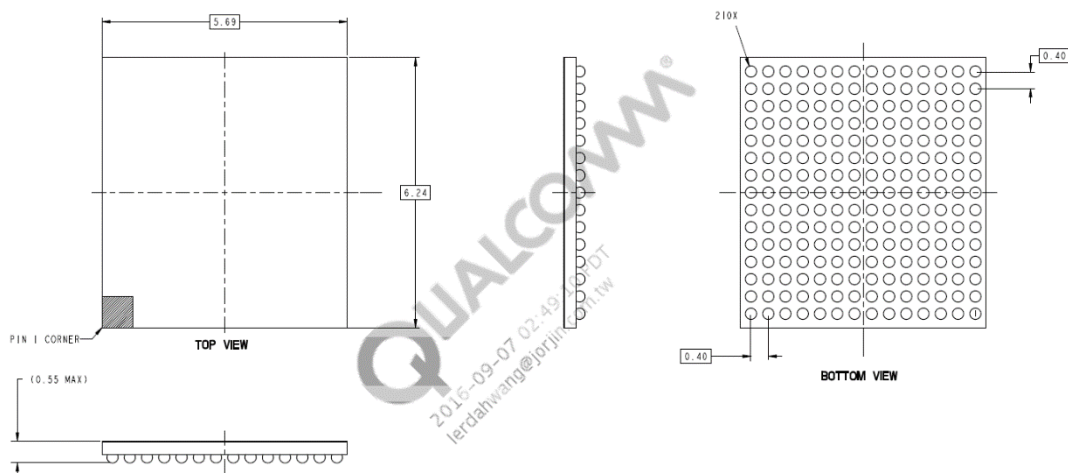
210WLN5P 5.69x6.24x0.55 package outline drawing
